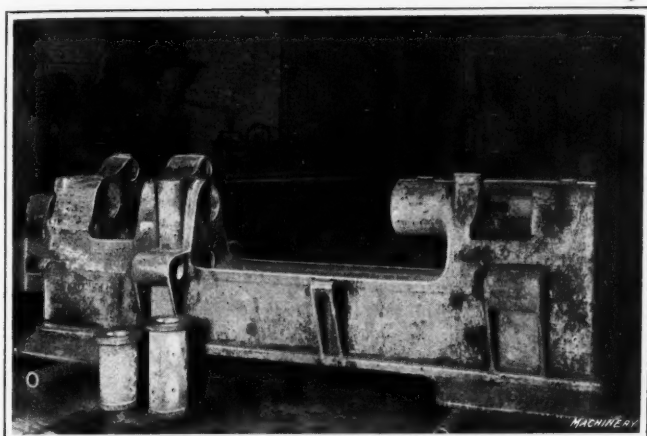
Lathe-bed Casting ready to have Bearings and Ways assembled in Place. Note Headstock Spindle Bearings standing on Floor
